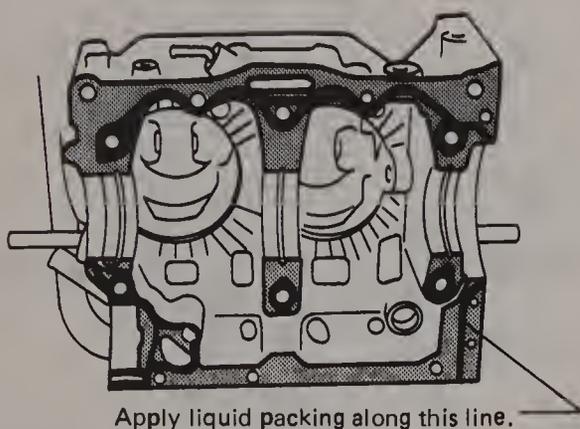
Apply liquid packing to the block mating surface as shown (Sec 5)
